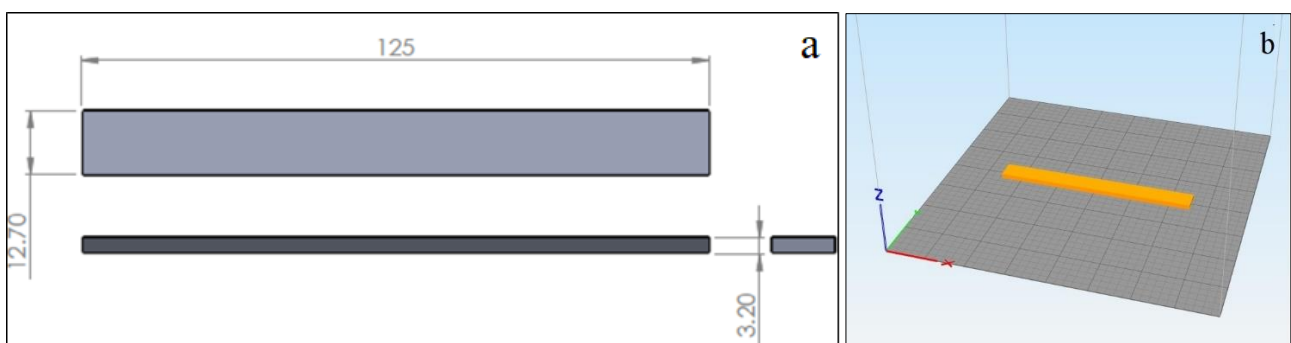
Bending test sample (a) drawing in accordance with ASTM D-790 (b) 3D printing (ASTM, 2003)
